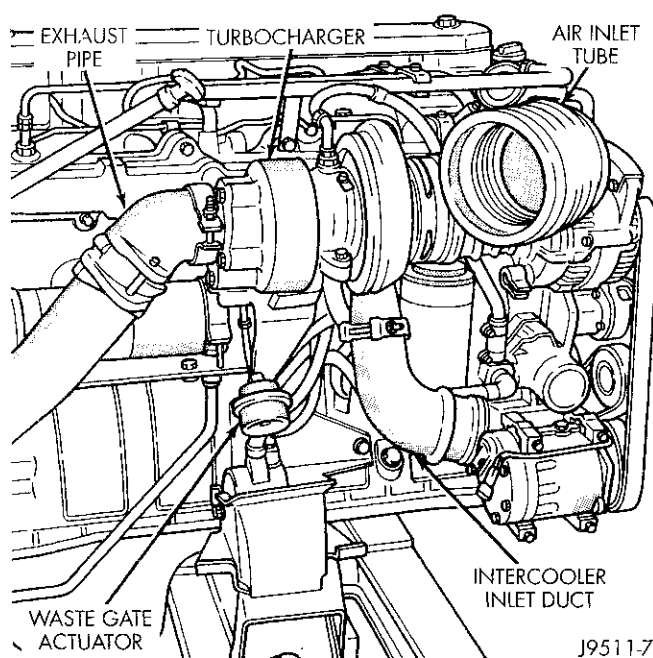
Air Cooler (Intercooler) Inlet Duct
